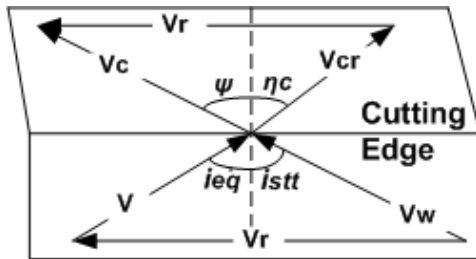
View of velocity relations on rotary tool rake face and workpiece cutting face.
